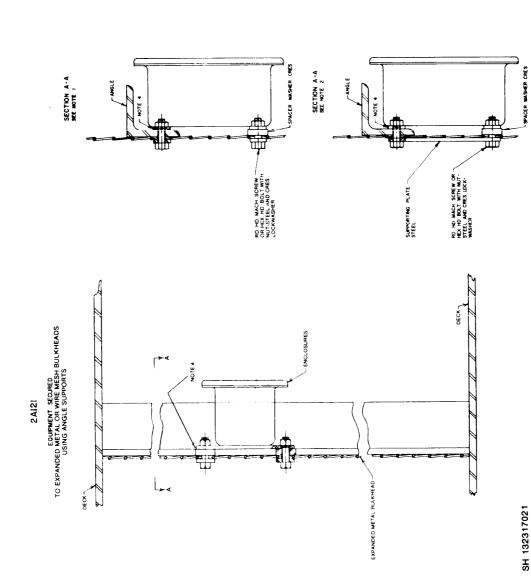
A12. Equipment mounted on expanded metal or wire mesh bulkheads.
